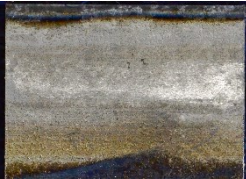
Analysis of fracture surface after the interface fracture
